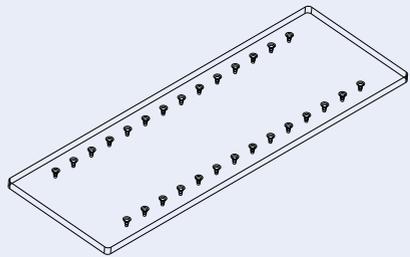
Microscopy slide through-hole platform – version with 28 fluidic interfaces
